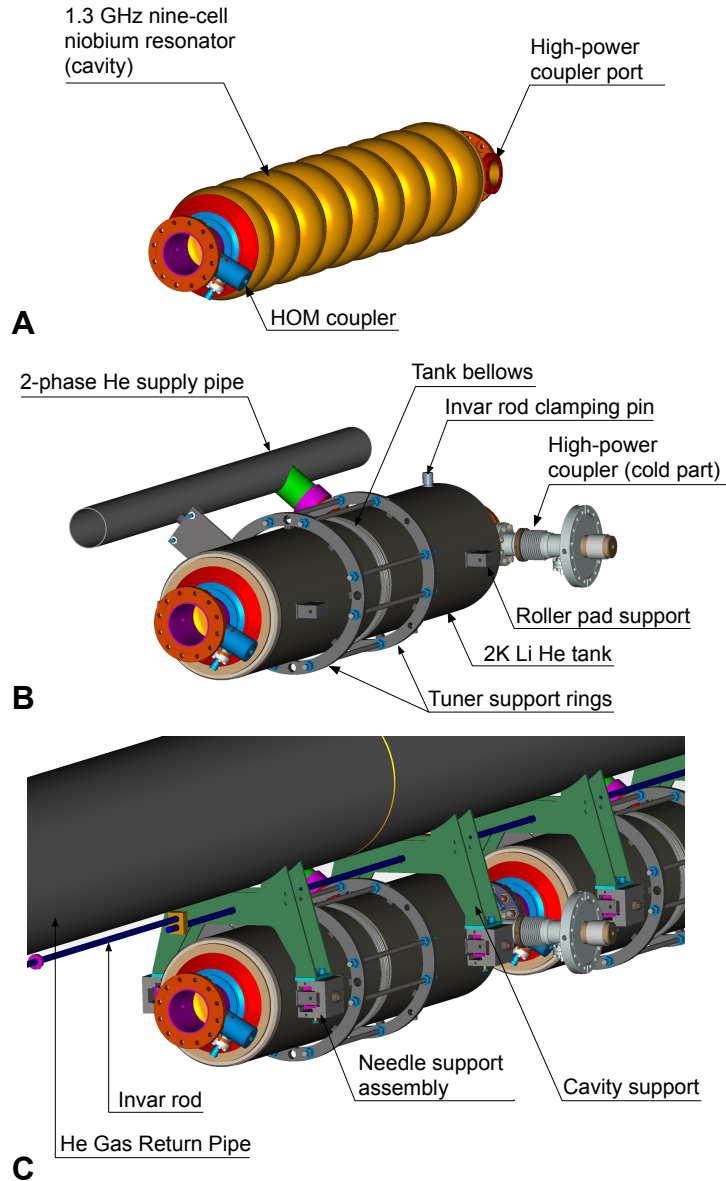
The baseline cavity package and string assembly: (A) the nine cell cavity (resonator); (B) the “dressed” cavity, showing the helium tank, 2-phase helium supply, high-power coupler (cold part) and the mount for the cavity tuner; (C) cavity package mounted into the cavity string and cryomodule. (Note the “blade” cavity tuner is not shown.) (Ed: NJW: Do not have a CAD model showing the blade tuner unfortunately.)
